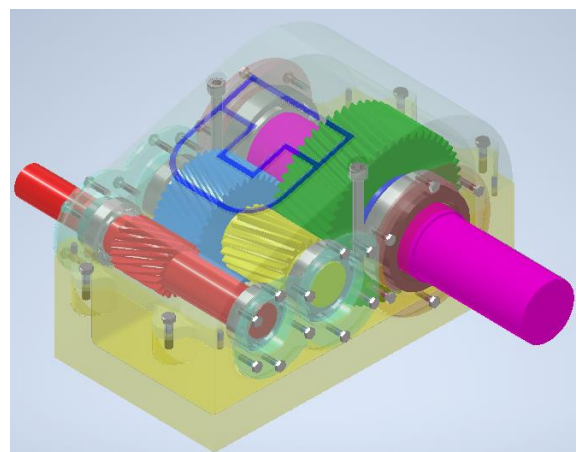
Example of a gearbox CAD model. CAD, computer-aided design
